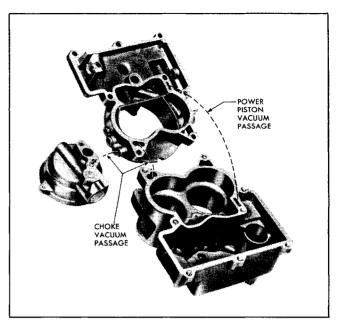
B-75 Passage Identification—Bowl to Cover to Choke Housing
